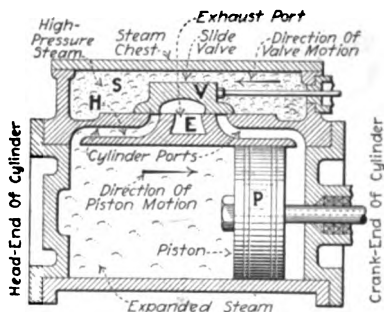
Point of head-end release—expanded steam in the head end of the cylinder about to be released or exhausted into the exhaust port.
